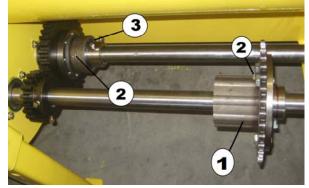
Greasing of Clutches Key 1 - Main Clutch Key 2 - Fitting Key 3 - Overrunning Clutch
